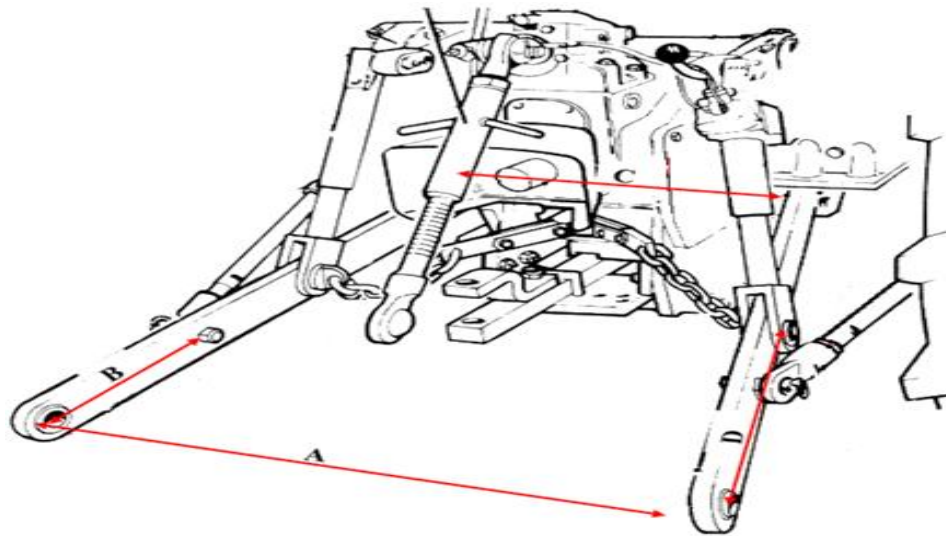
Dimensions and size of the end position of the tractor's lower arm (A: 100 cm, B: 39 cm, C: 39 cm, D: 63 cm)
